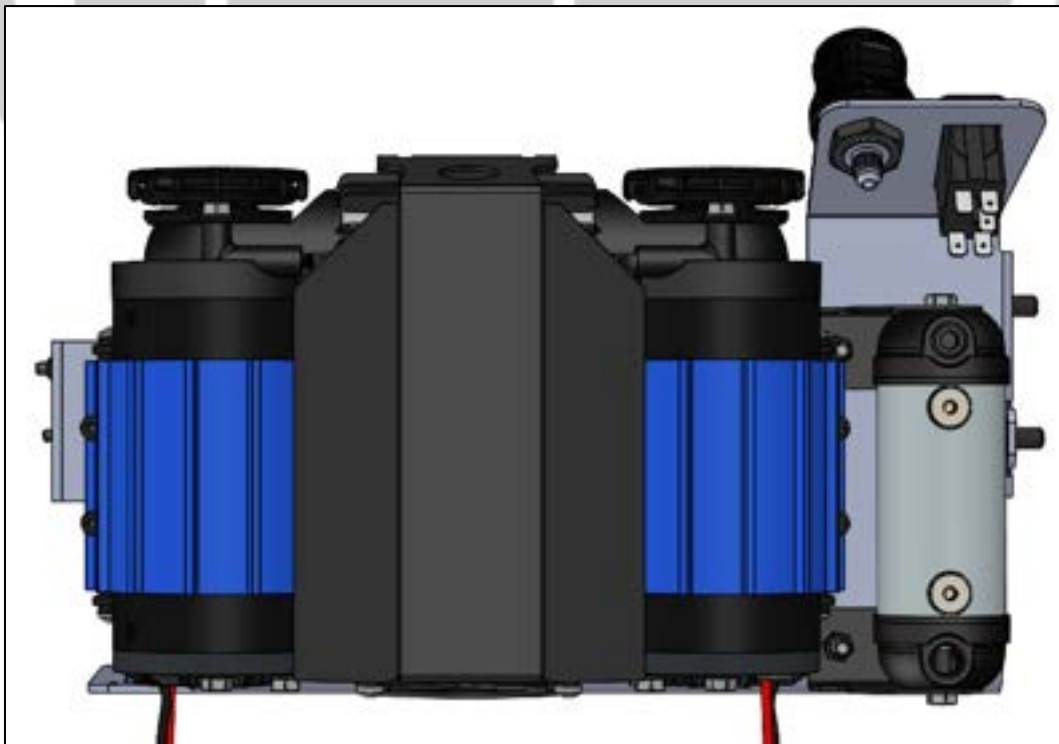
Brushed Twin Compressor bracket pre-assembly rear view
